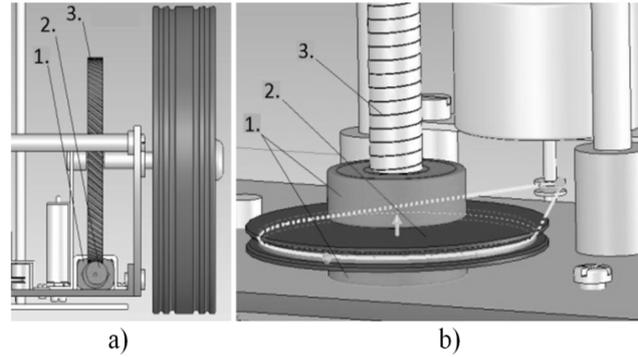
a) The wheel mechanism: 1 – motor, 2-3 – worm gear speed reducer; b) Screw-nut mechanism: 1 – ball bearings, 2 – belt wheel & nut, 3 – screw.
